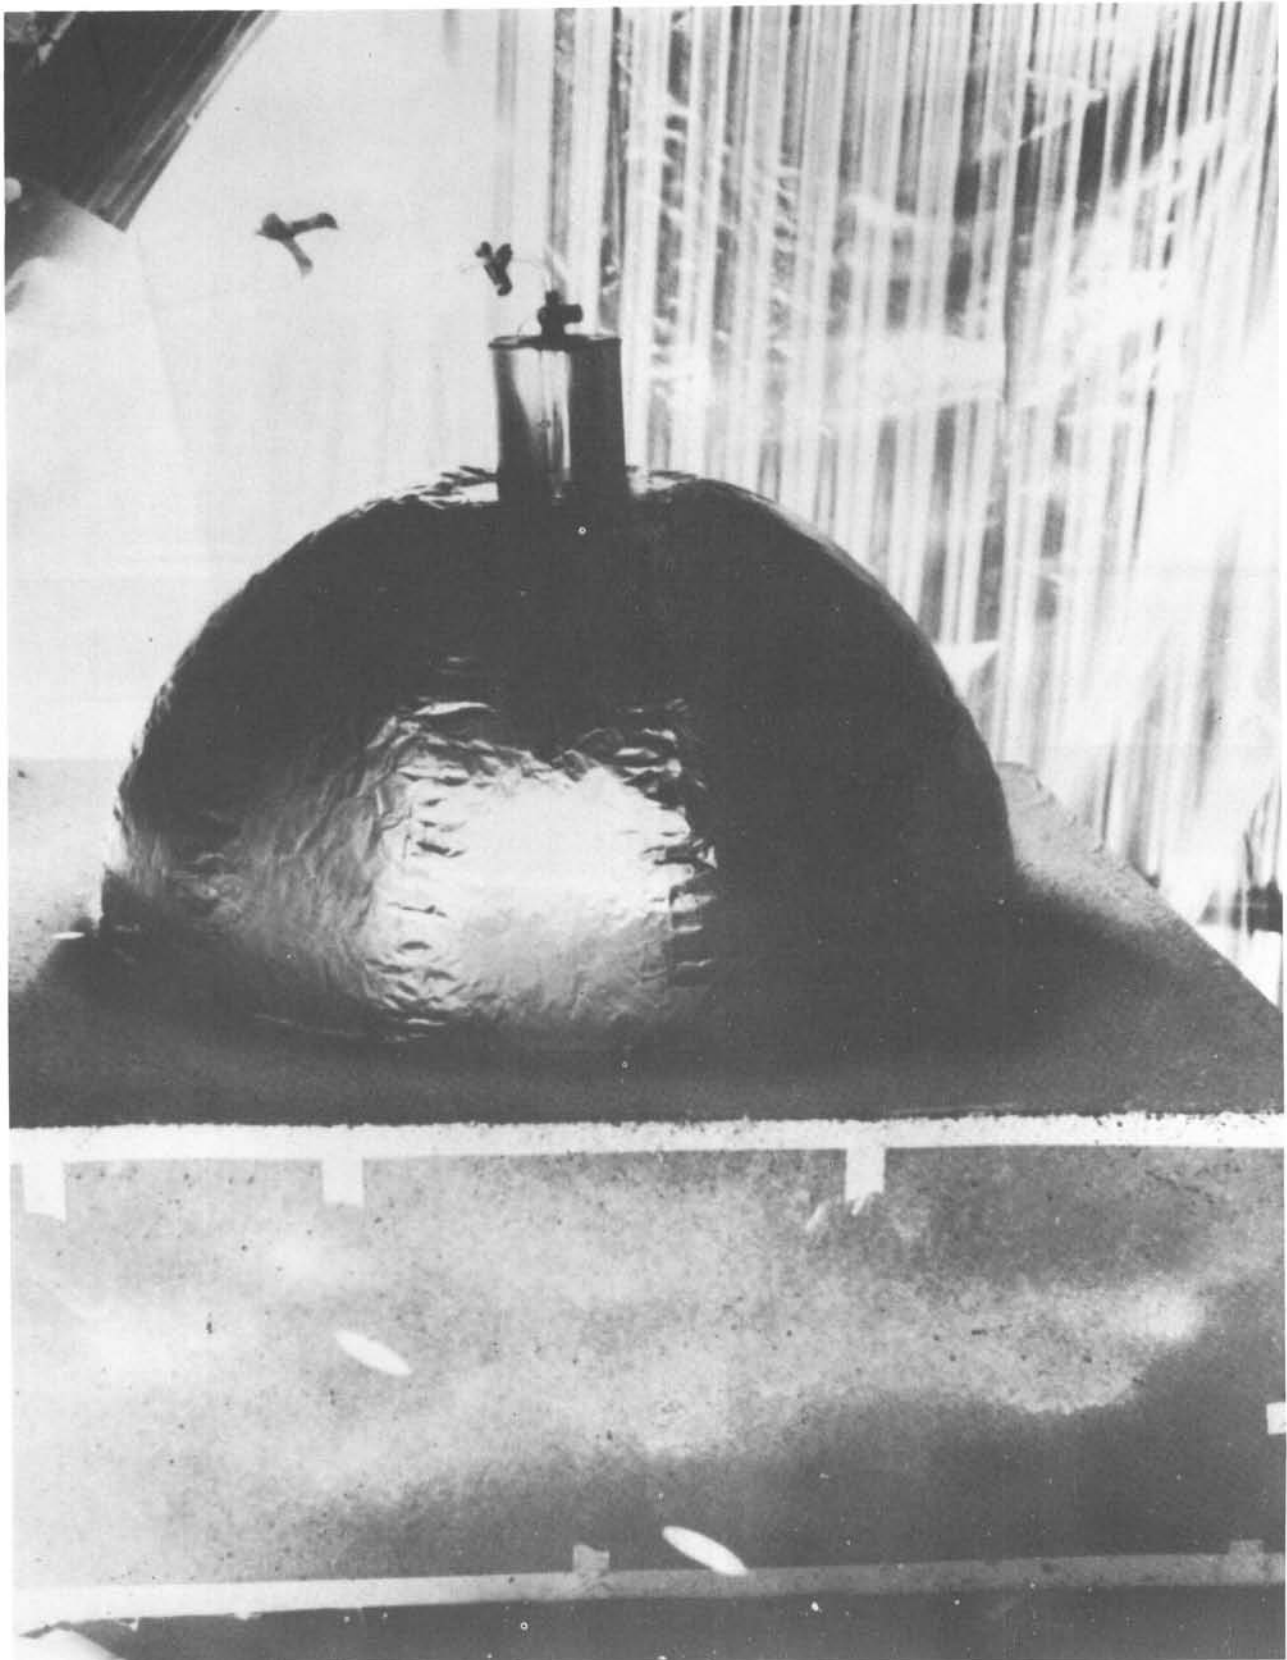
30-INCH-DIAMETER SPHERE COATING FIXTURE
